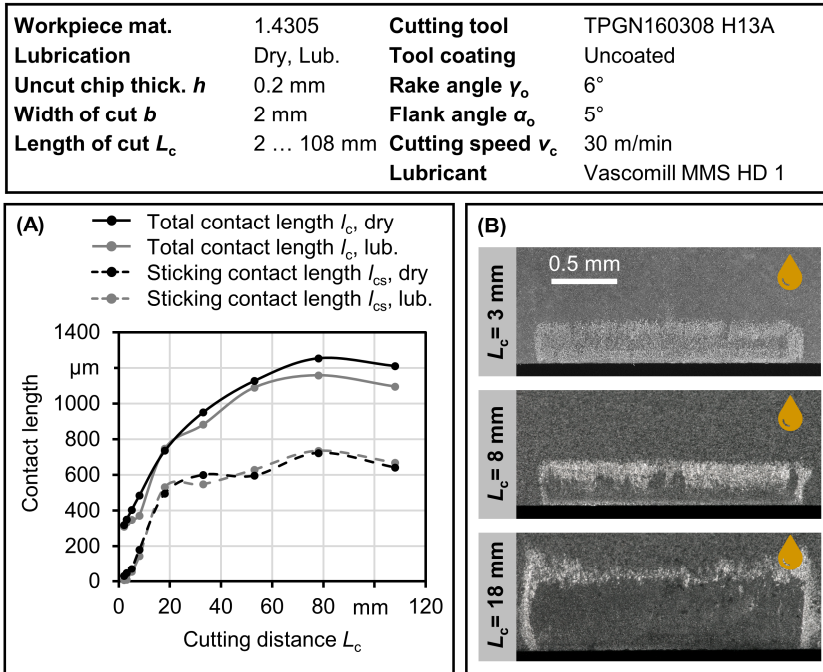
Tool-chip contact zones sizes, (A) Sticking and total contact lengths of dry and lubricated cutting, (B) Images of rake face showing adhesion marks resulting after different cutting lengths; (Alammari et al., 2023)
